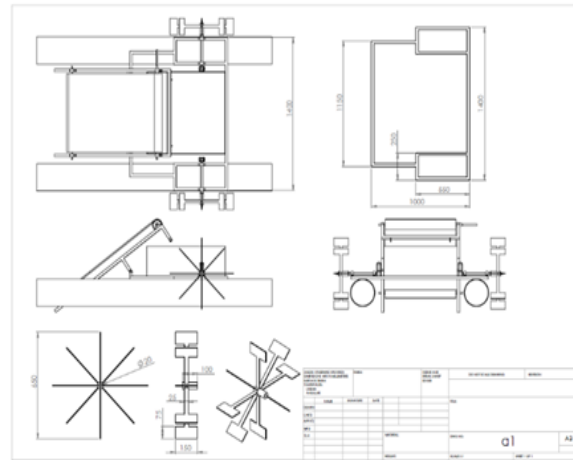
CATIA Design of Garbage Removal Machine from Water Surfaces in 2-D
